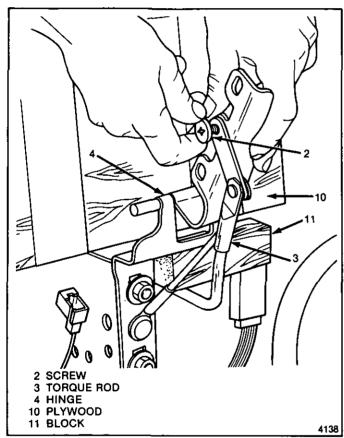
Attaching Rear Compartment Lid Torque Rod
